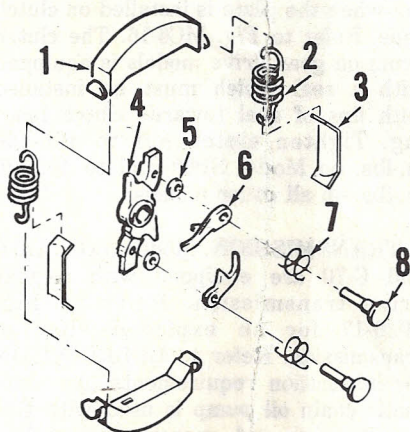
Exploded view of clutch used on all models except SP80.
